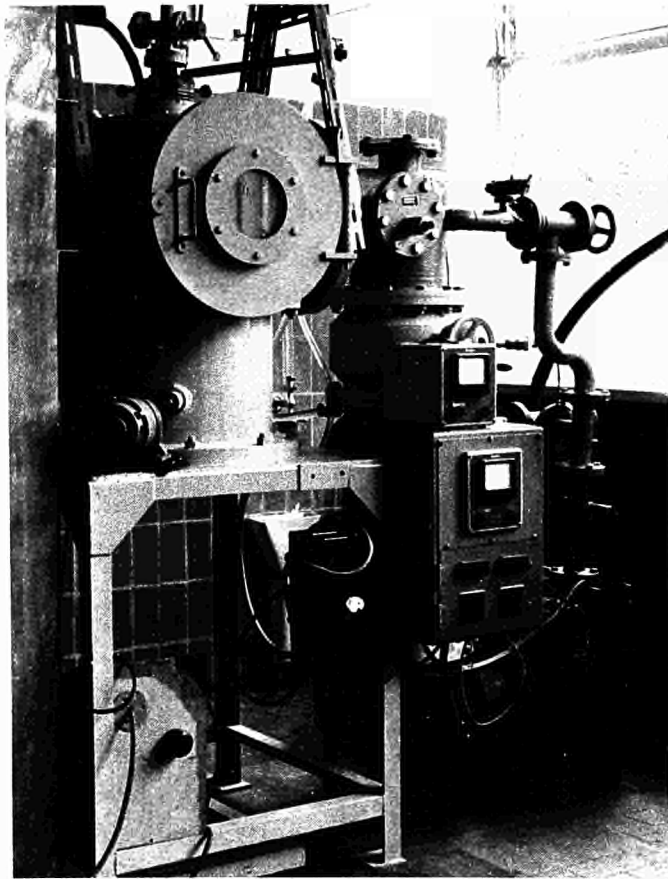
Equipment used at the C.E.N. laboratory for welding.
